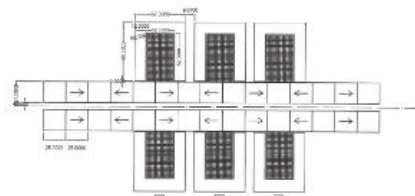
Drawing of tubular shaped LM, according to the required force.
